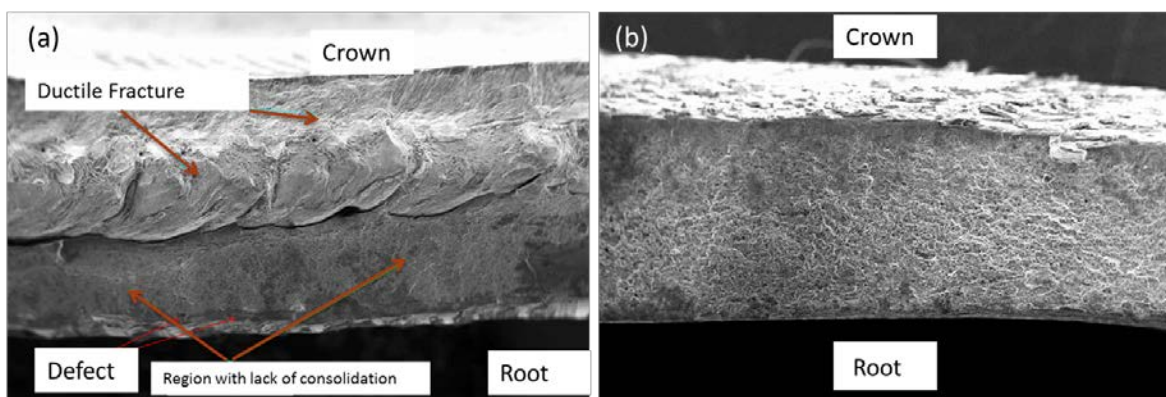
Fracture morphologies of fractured samples showing contrast between fracture at weld nugget (a) and that at the HAZ (b) for welds made in a precipitation hardening alloy at 4.5 m/minute.
